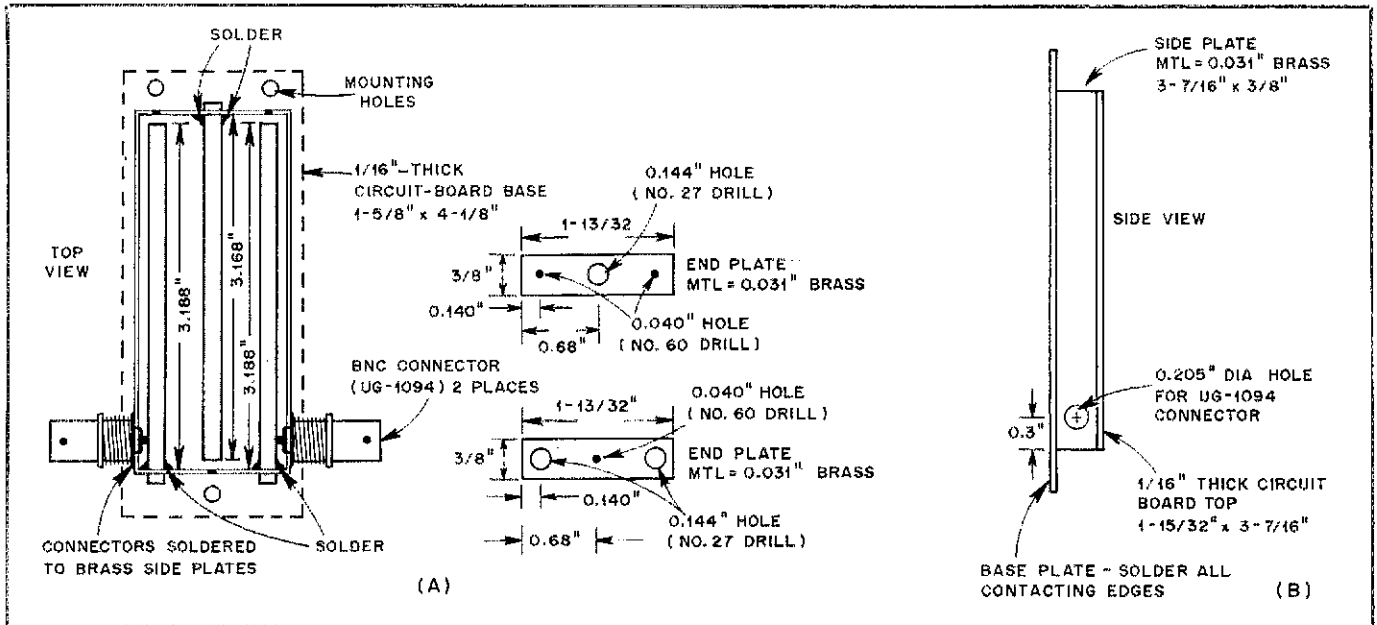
Construction details for the three-resonator interdigital filter. No tuning is required if you follow the dimensions given. The inside dimensions of the box are critical.
